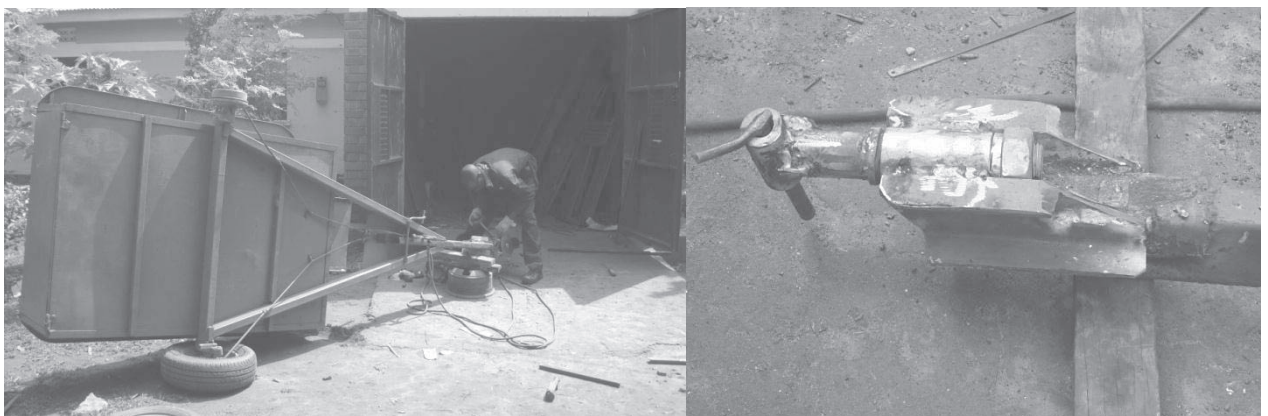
Left: Joseph welding the Trailer hitching unit. Right: Welded hitch unit
